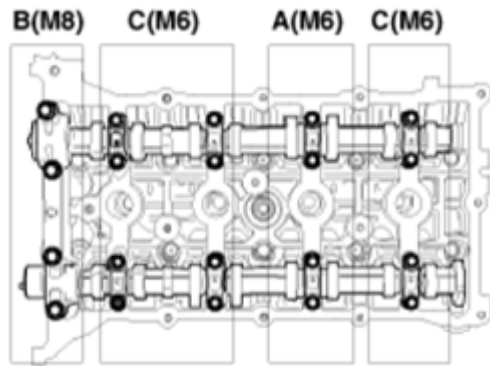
Camshaft Bearing Caps Tightening Sequence
